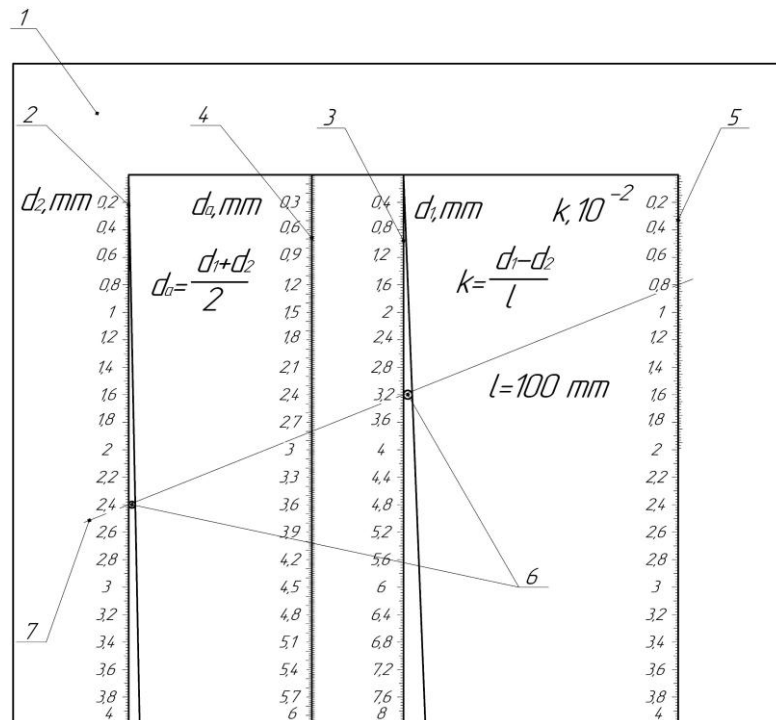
Scheme of the proposed measuring device: 1 – frame; 2 and 3 – measuring surfaces; 4 and 5 – scales; 6 – stem; 7 – imaginary straight line
